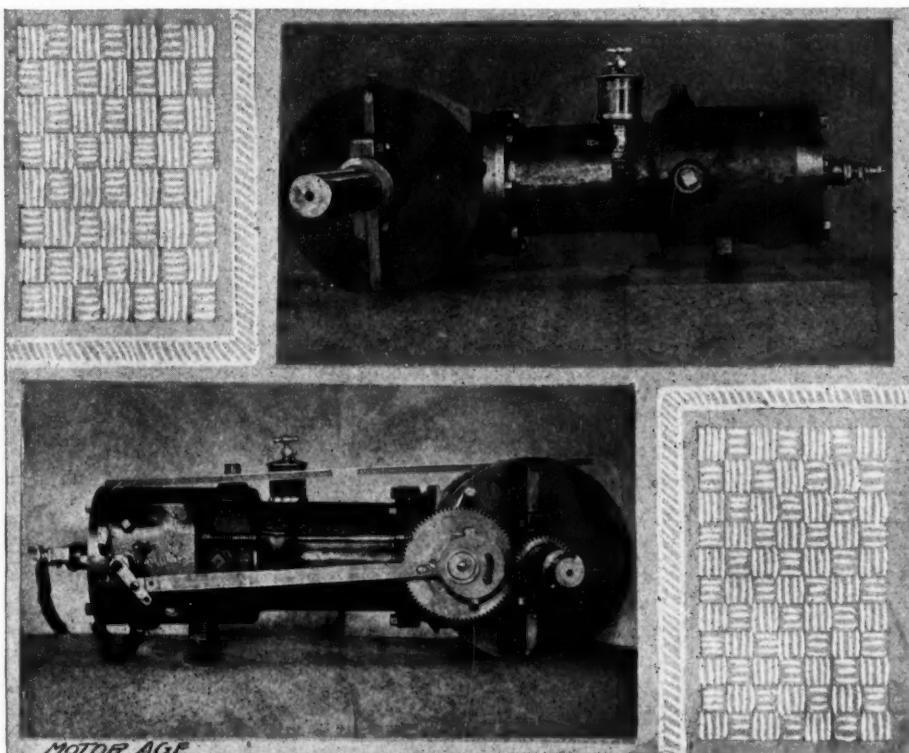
TWO VIEWS OF A SINGLE-CYLINDER, HORIZONTAL, WATER-COOLED GASOLENE MOTOR.
